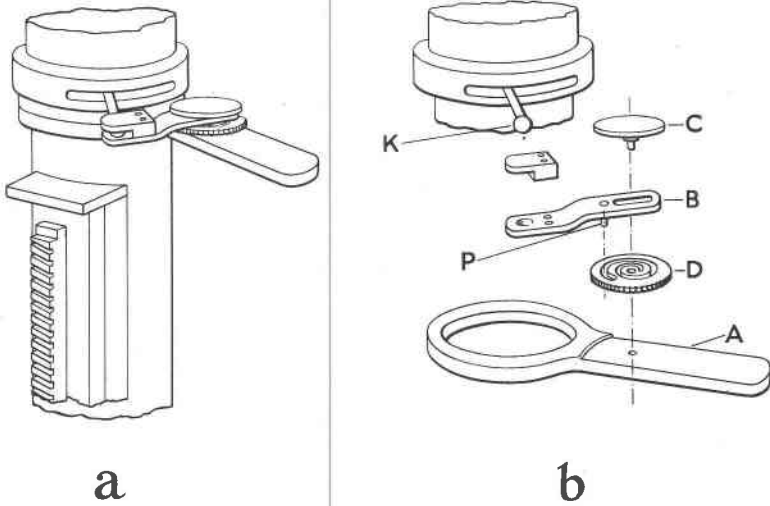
Iris diaphragm device. (a) assembled. (b) "exploded" view.
